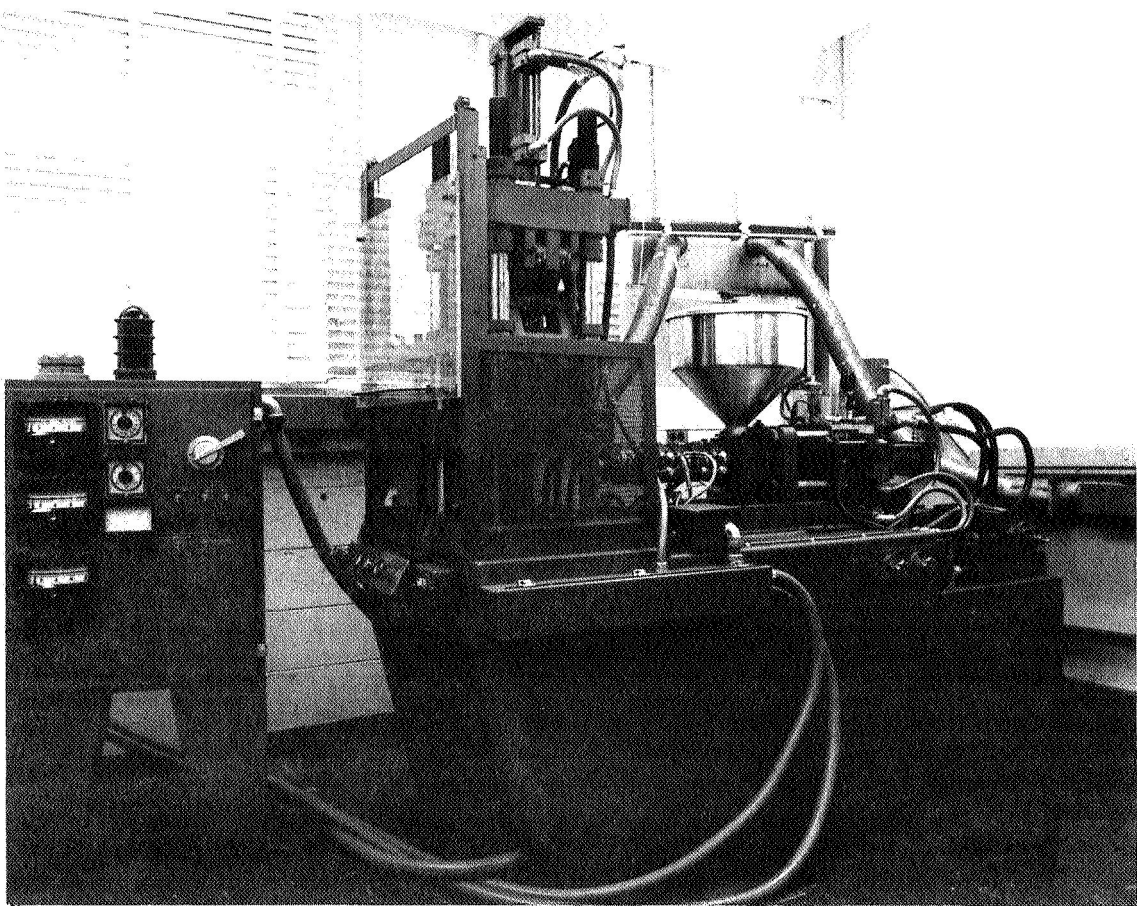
SCREW INJECTION MOLDING MACHINE
